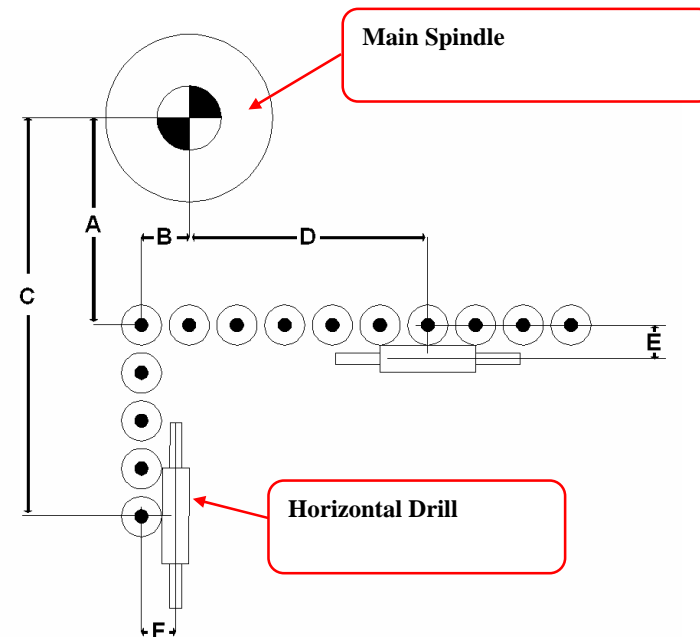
(see Table Below) Work Offsets must be put in Table to swap primary position of the axis. Your Multidrill postprocessor will select the M code and T codes, however you can test drill block by going to MDI mode and dropping selected drill. Example M88T1 drops corner drill.
